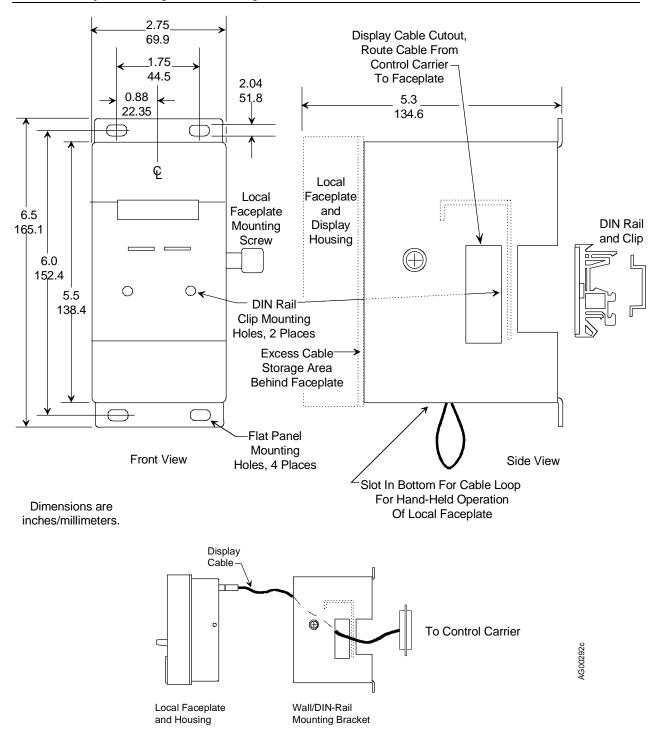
Local Faceplate and Wall/DIN-Rail Bracket Dimensions
